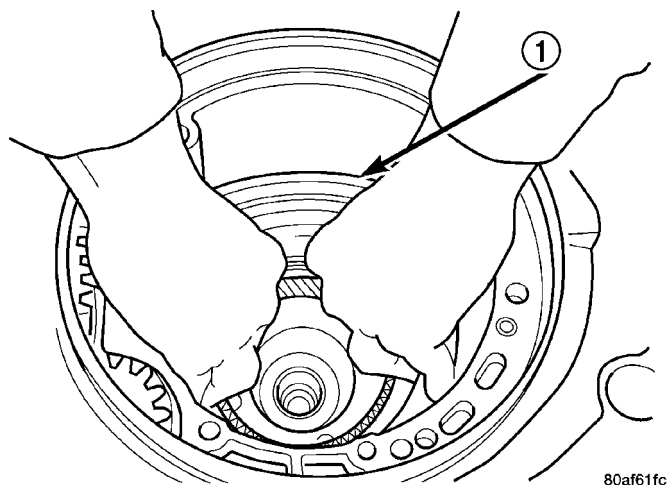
Remove 2/4 Clutch Retainer Snap Ring
